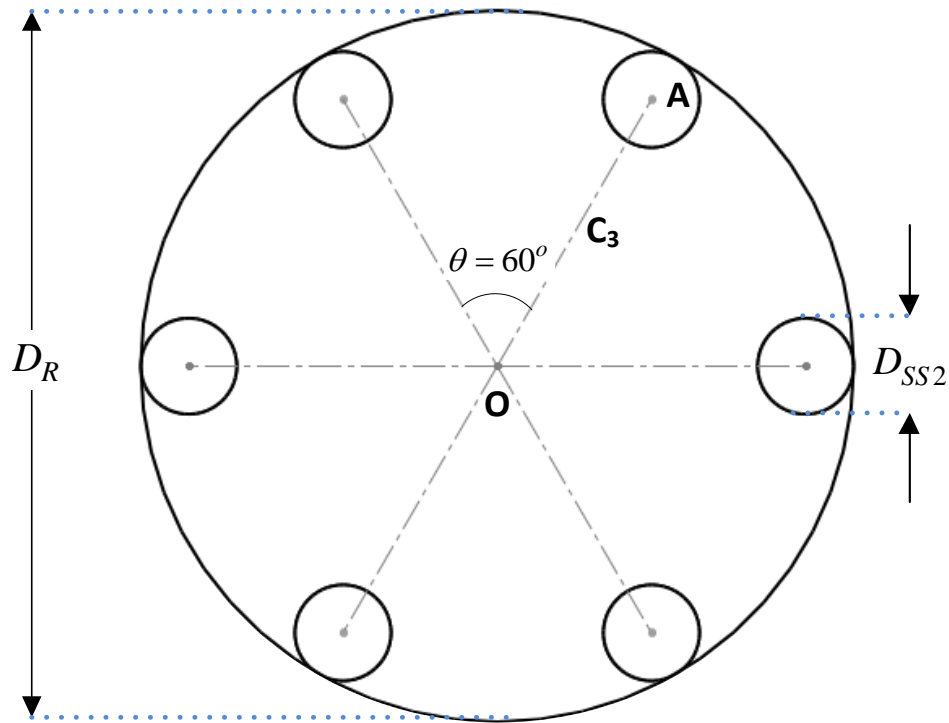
Sketch showing the arrangement of the gears in Mesh 3
